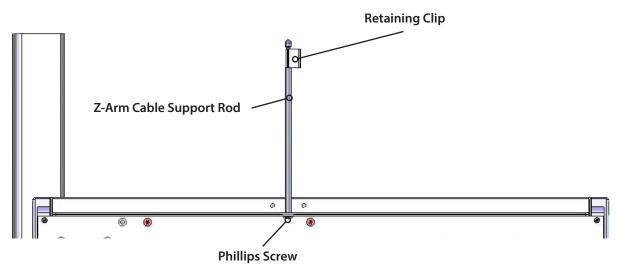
Z-Arm Cable Support Rod Installation (Partial Rear Panel View)
